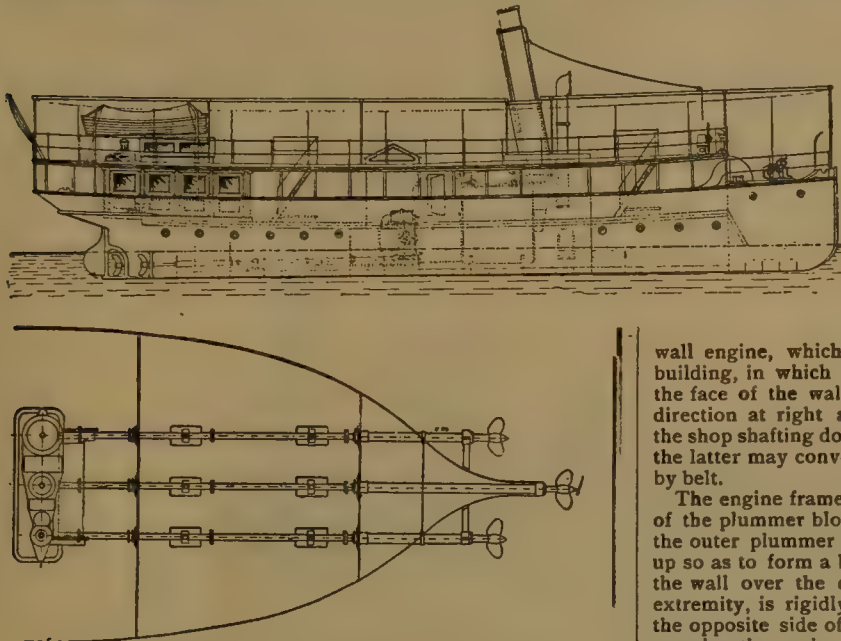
shows a side elevation of the boat, and fig. 2 a plan of the stern, with the arrangement of screws. All three shafts are driven by one triple-expansion engine with cylinders 9 in., 14½ in., and 27½ in. in diameter and 10-in. stroke; in ordinary service this will run about 300 revolutions. The engine is so arranged that one cylinder acts on each screw, the three cranks being coupled by a rod in such a way as to counterbalance the large cylinder. This arrangement is fully described in the JOURNAL for May last, page 232.
